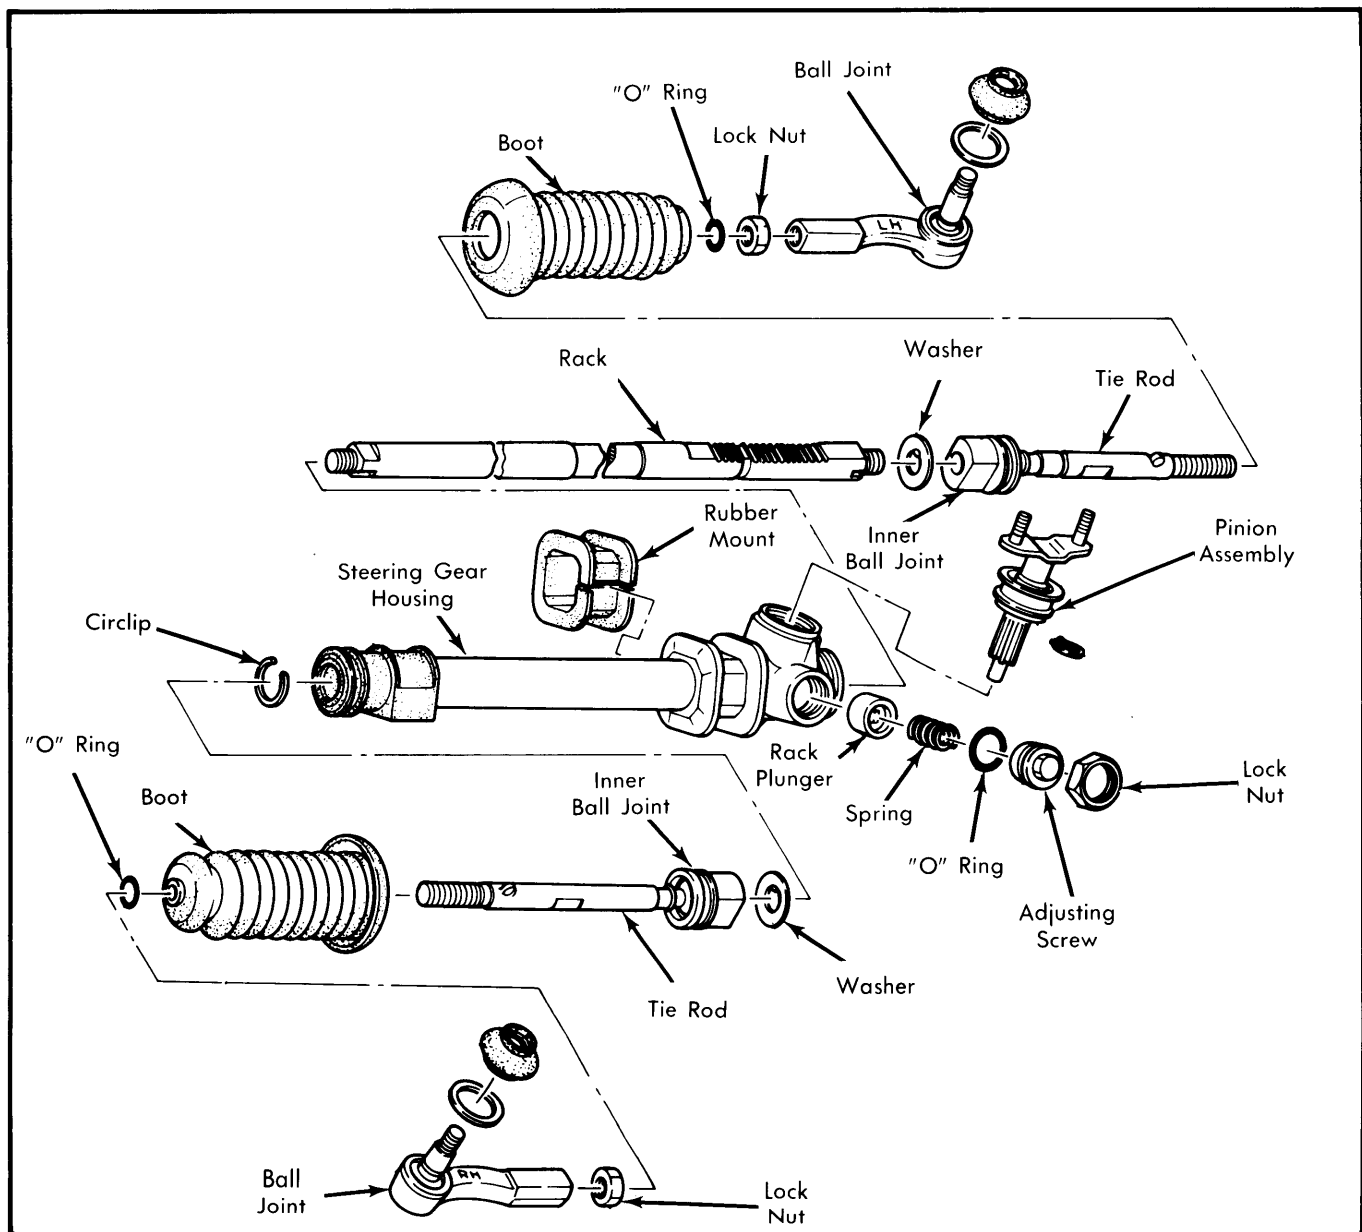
Exploded View of Subaru Rack & Pinion Steering Gear Assembly
